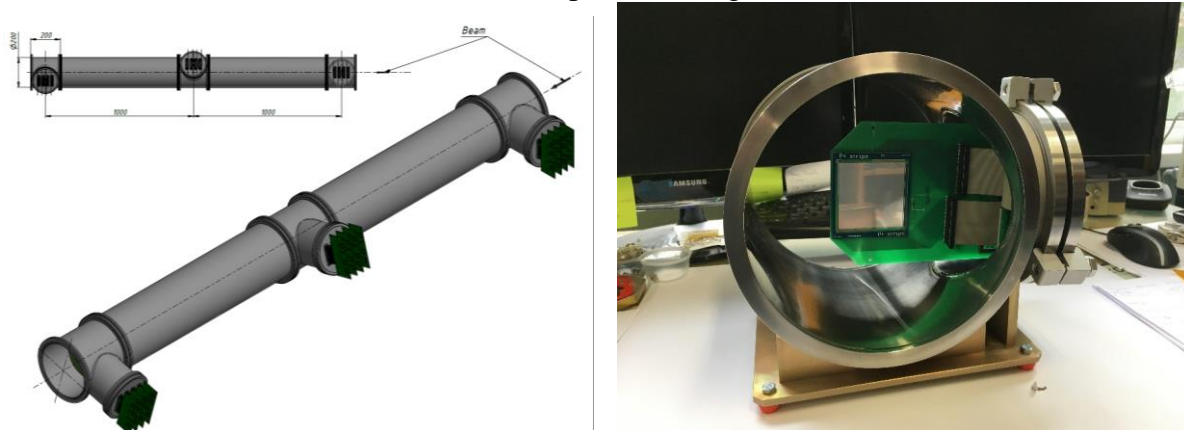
Left: Beam pipe section with the beam tracker modules. Right: Beam tracker module inside the beam pipe section.
